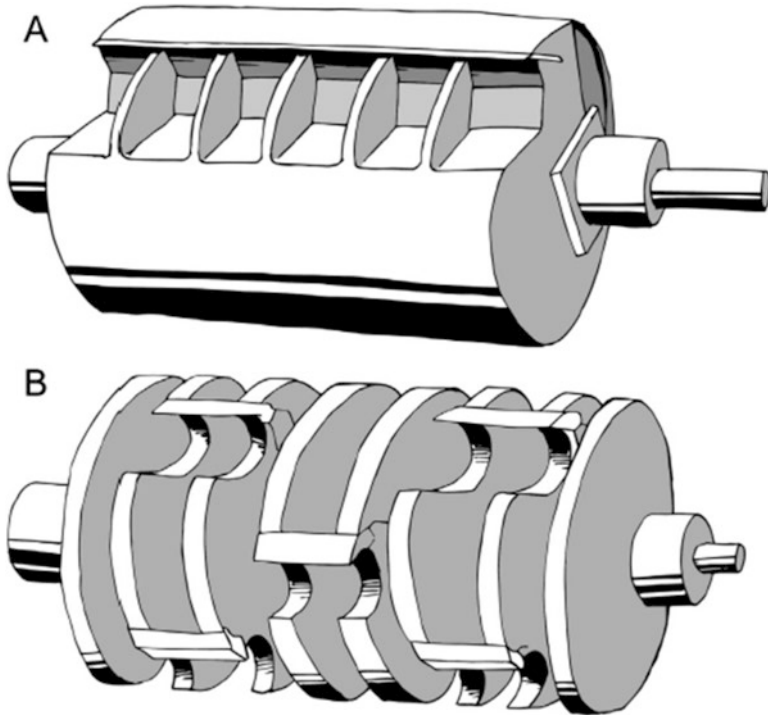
Illustration types of drum chipper machine: closed drum with a full-length knife (A) and open drum with staggered short knives (B) [29]. Reprinted from Spinelli, R., Cavallo, E., Eliasson, L., Facello, A., Magagnotti, N. The effect of drum design on chipper performance, *Renewable Energy*, 81 (2015), 57–61, with permission from Elsevier
